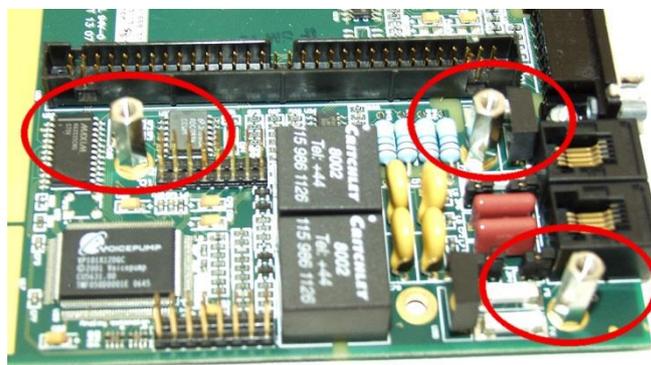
, IR44CF II – Hexagon threaded bolts for add-on cards
